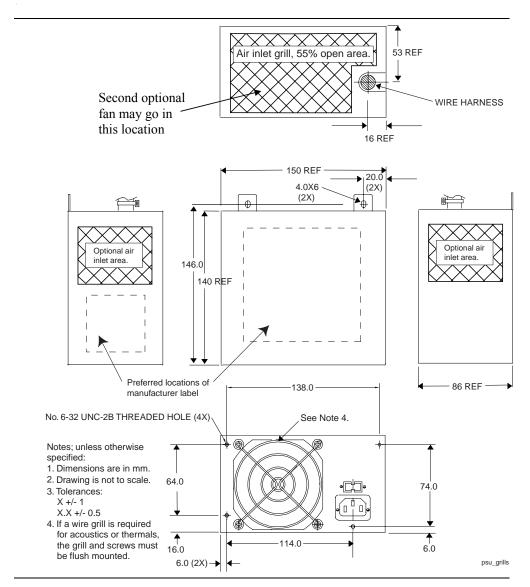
Power Supply Dimensions for Chassis That Does Not Require Top Venting
